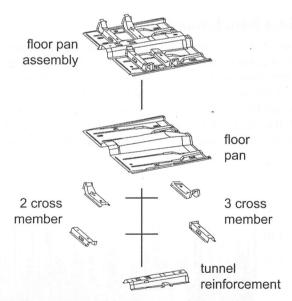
Floor pan assembly. (Courtesy of General Motors Corporation)
